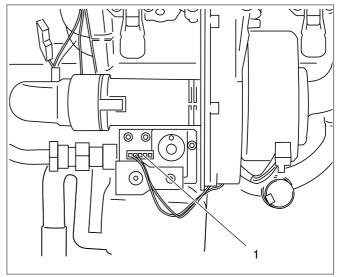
Replacing the gas control valve (e.g. HONEYWELL gas control valve)
